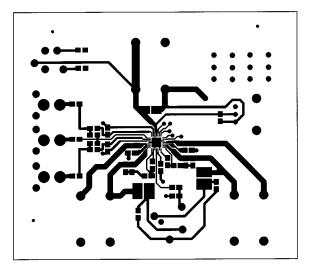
Recommended NJB PC Board Layout: Component-Side Layout
